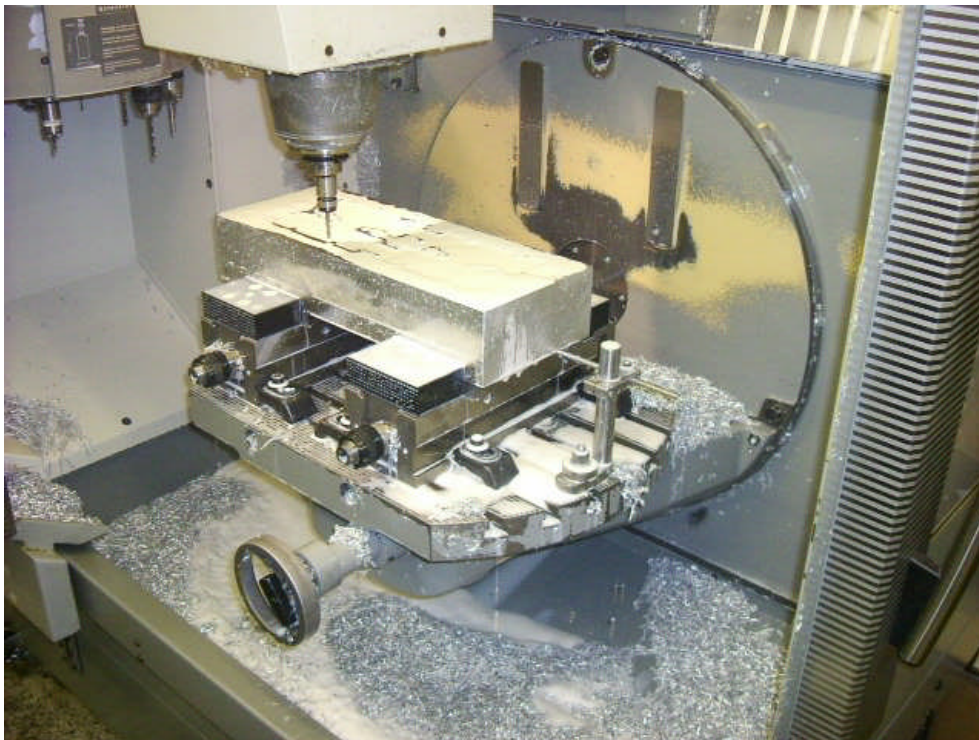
CNC cylinder head manufacturing at Jaye Engineering Ltd.
